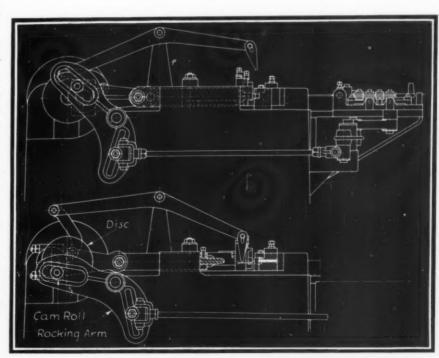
Two elevations of nail machine. Cam motion for operating feed mechanism is at left
